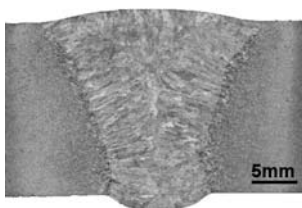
Macrostructure of a DWS-60G weld made in accordance with the welding procedure shown in Table 3 (Plate thickness: 19 mm).
